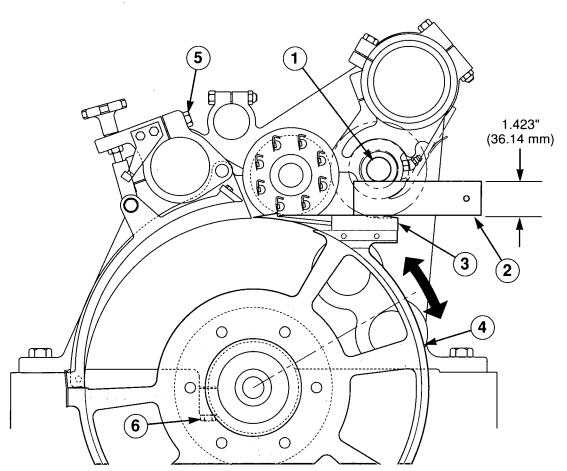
Rotate slice case to set circular knife clearance. (1) Circular Knife Spindle Shaft, (2) Gauge, (3) Slicing Knife Holder, (4) Slice Case, (5) Pinch Bolt, slice adjustment clamp, (6) Pinch Bolts, bottom of main support casting.
